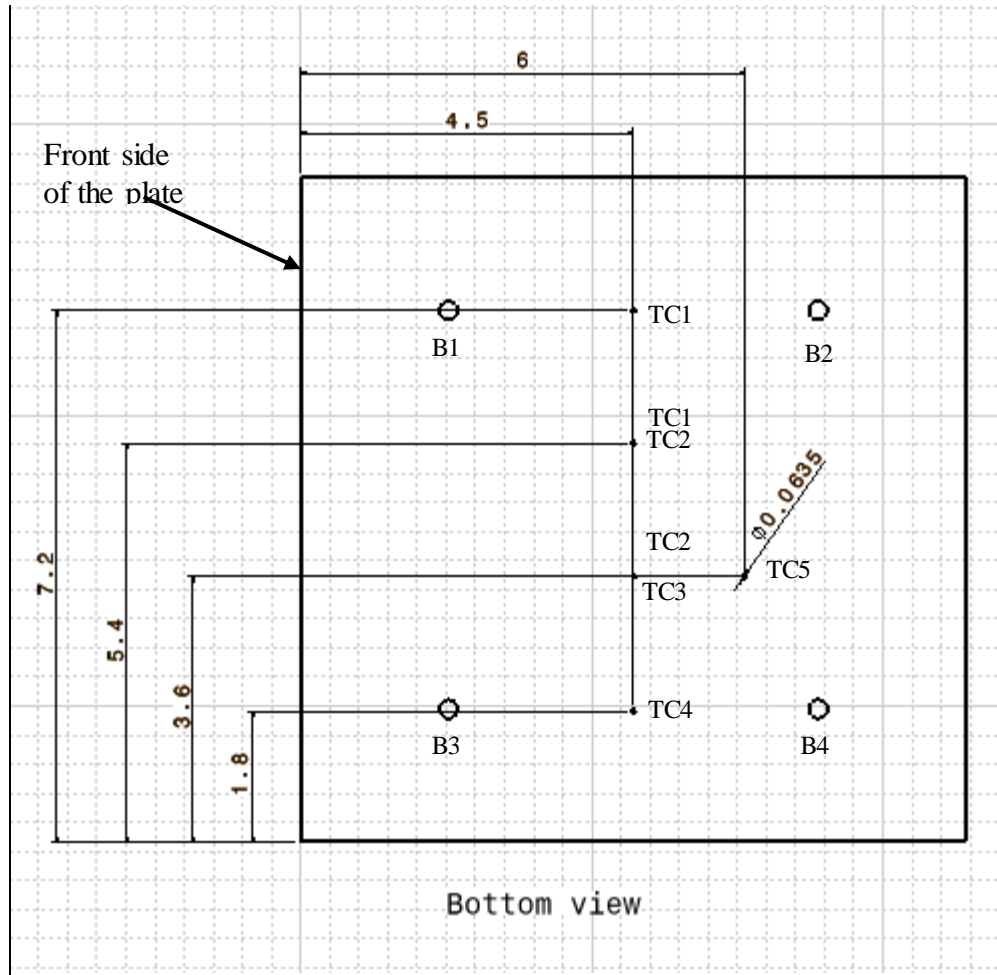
Bottom view of the stainless steel plate showing thermocouples and bolts location
